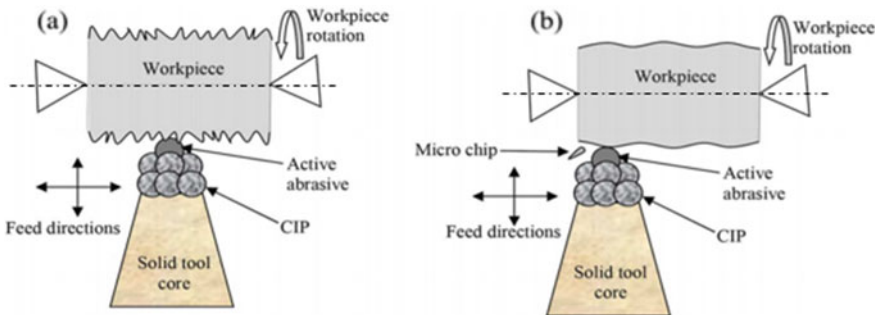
shows the material removal mechanism of the magnetorheological finishing process. The solid tool core was magnetized by the help of an electromagnetic coil and holds the active abrasives which approach the cylindrical workpiece as depicted in Fig. 6a. These active abrasives indent into the roughness asperities
